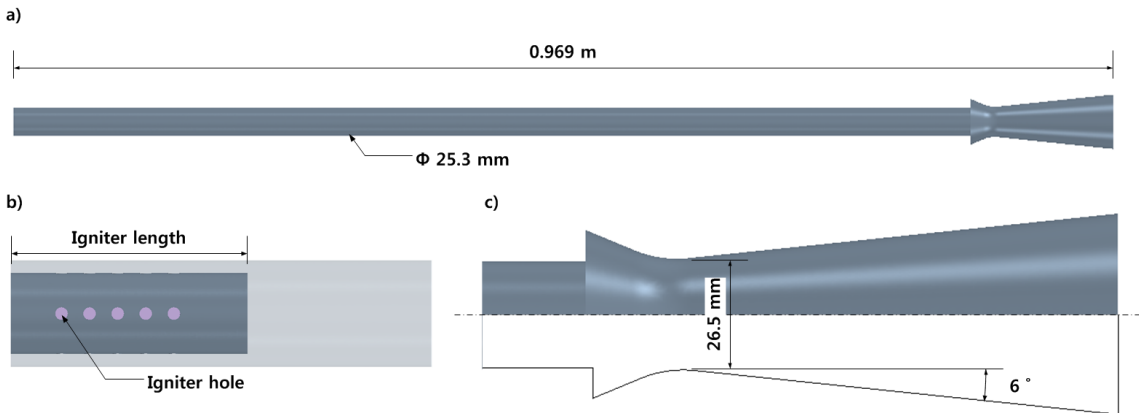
Geometry modeling ; a) whole propulsion system, b) Igniter part, c) Nozzle part.
